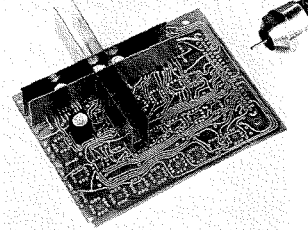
Ejector tool, and ejection guide in position on a micromodule printed-circuit board.
